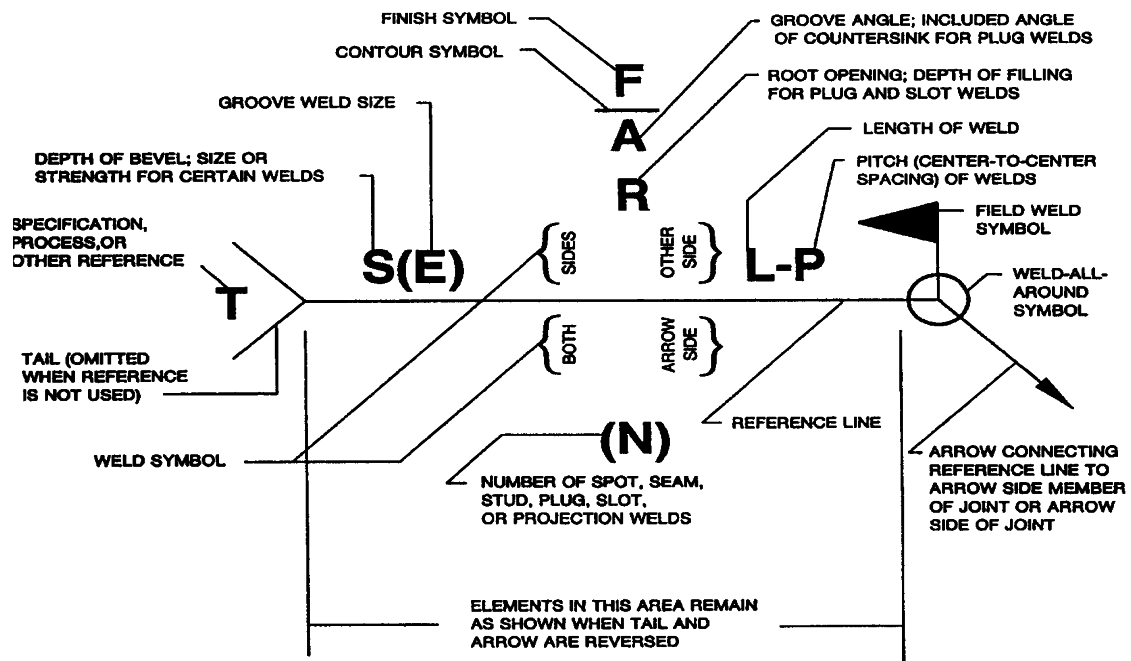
Standard Location of Elements of a Welding Symbol
